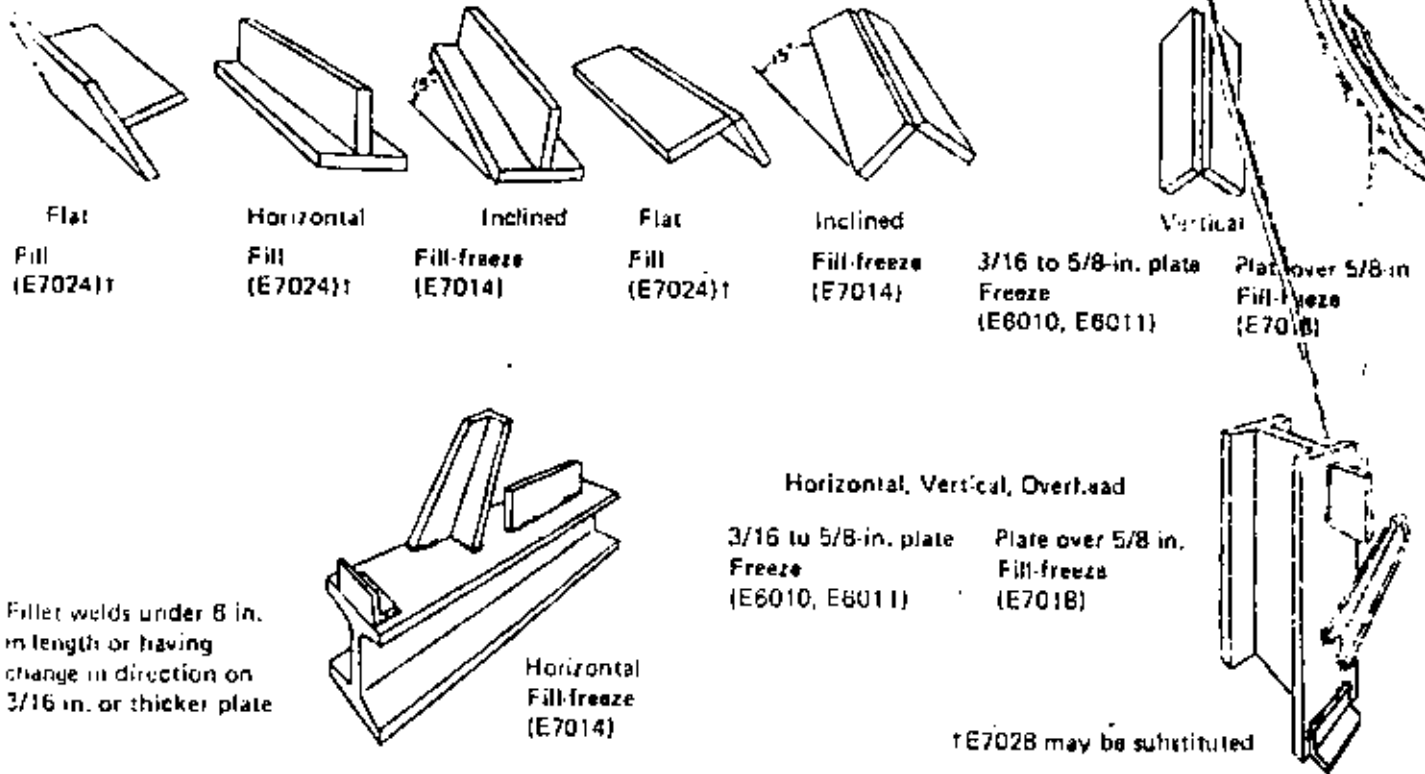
Guide to selection of electrodes for fillet and corner welds
